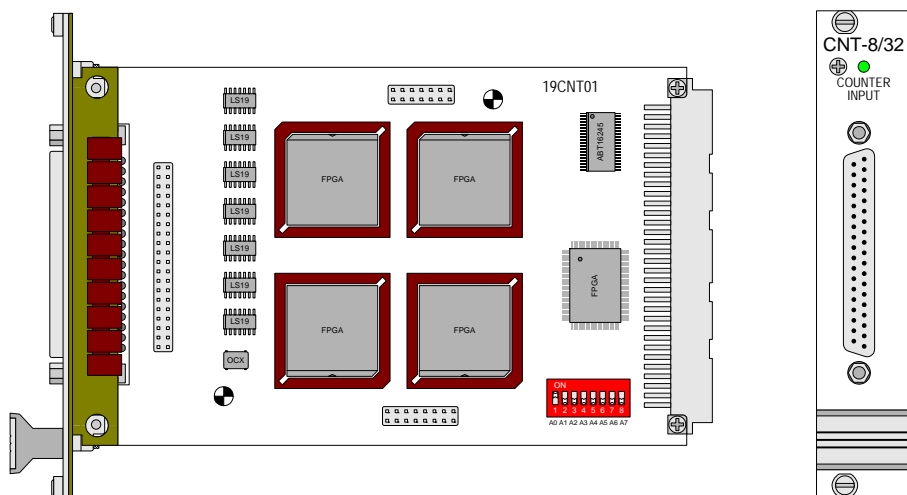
Pro-CNT-8/32 REVA: Board and front panel
